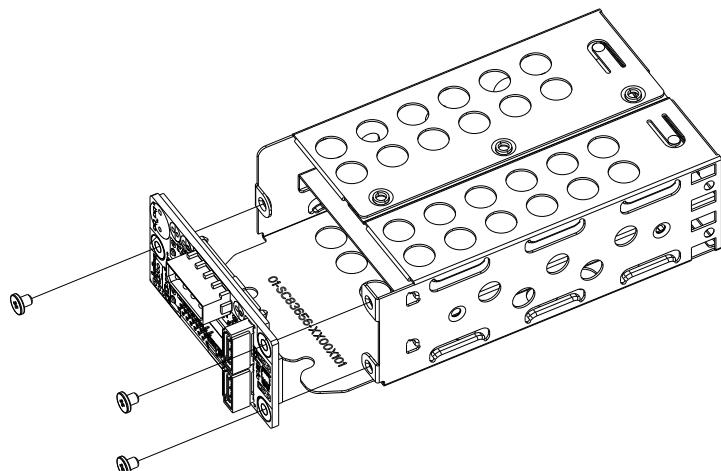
Attaching the PCB Backplane to the Hot-Swap Cage
